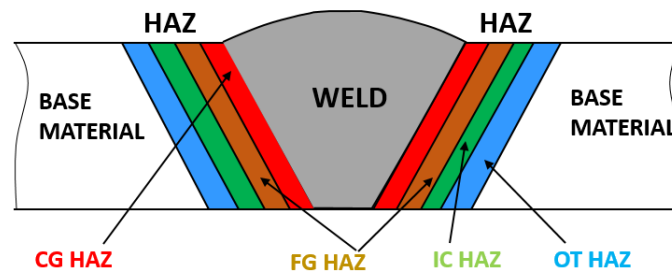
1 Welded joint; Base material, HAZ, Weld material.
